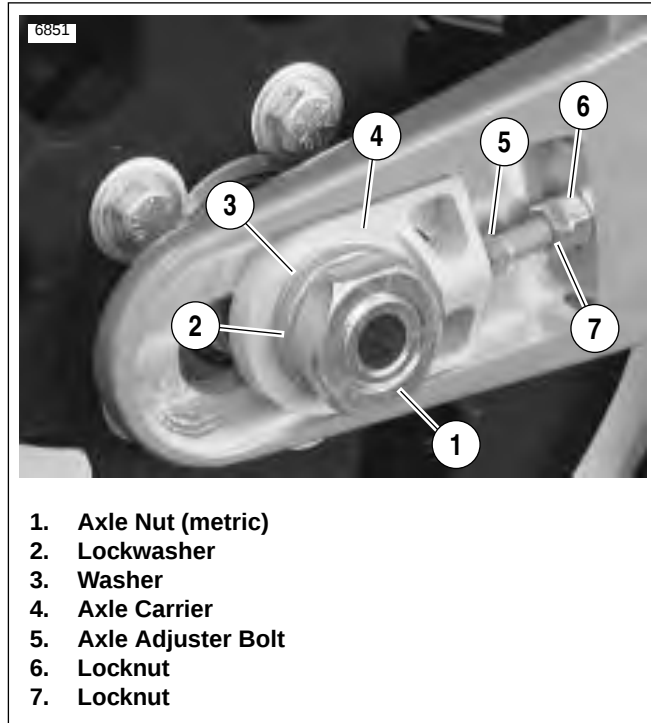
Rear Wheel With Axle Carrier (Right Side)
